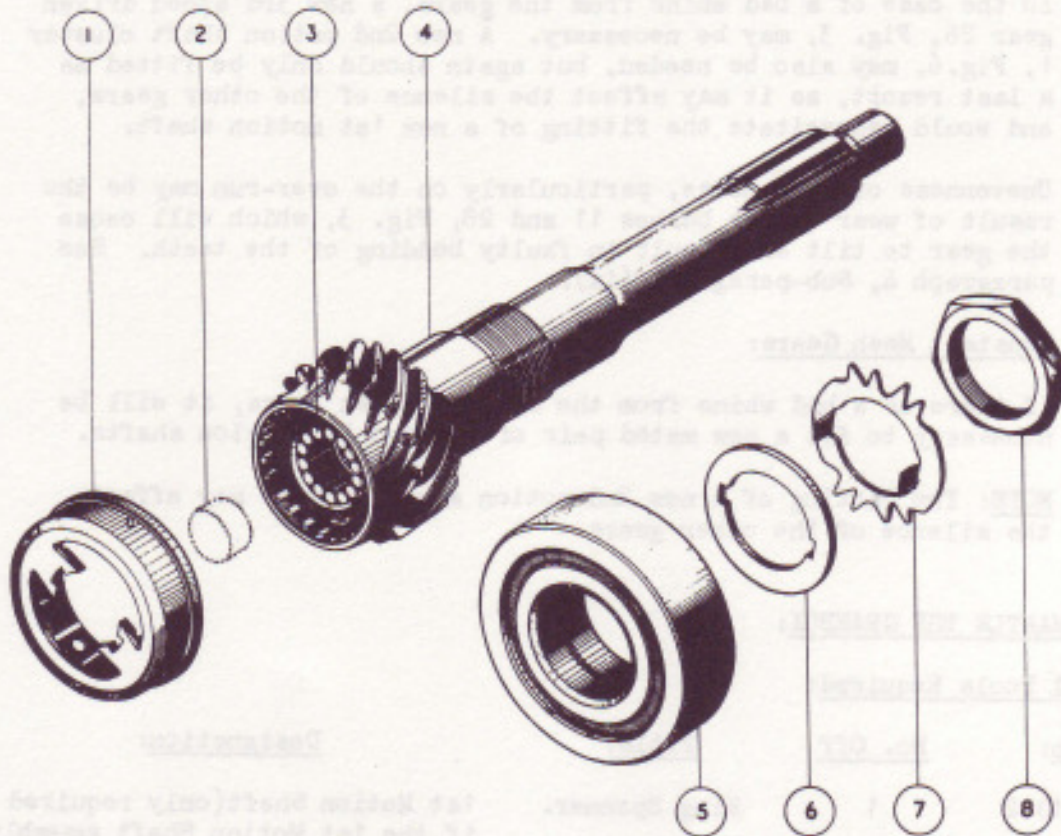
EXPLODED VIEW - 1ST MOTION SHAFT.
